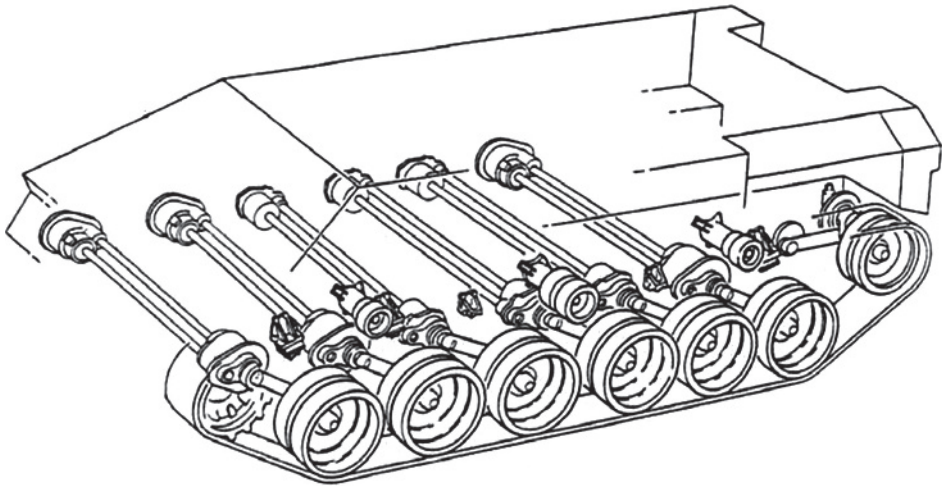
Warrior running gear layout. Source: Courtesy of Ministry of Defence.
